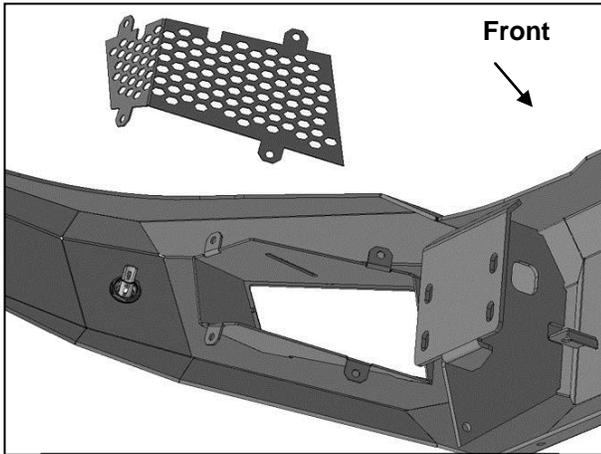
Attach Mesh Fill Panel to "L" Brackets
